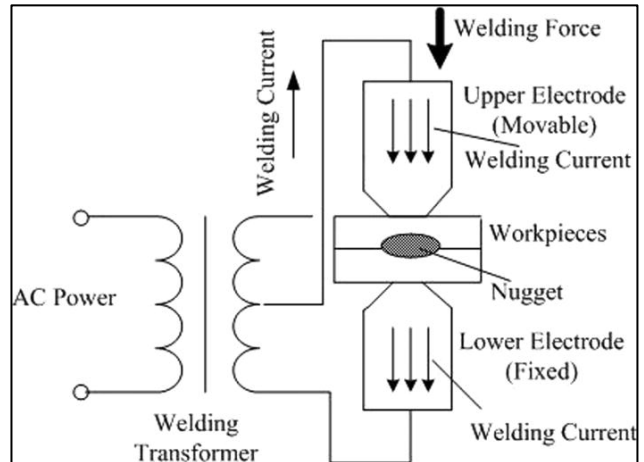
Working Principle of Resistance Spot Welding
